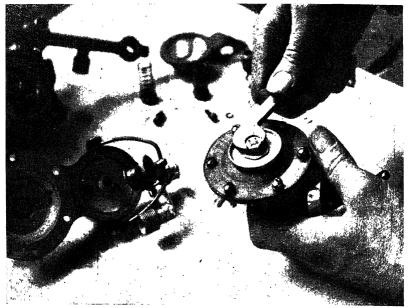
Assembling the de havilland a.c. fuel pump.
